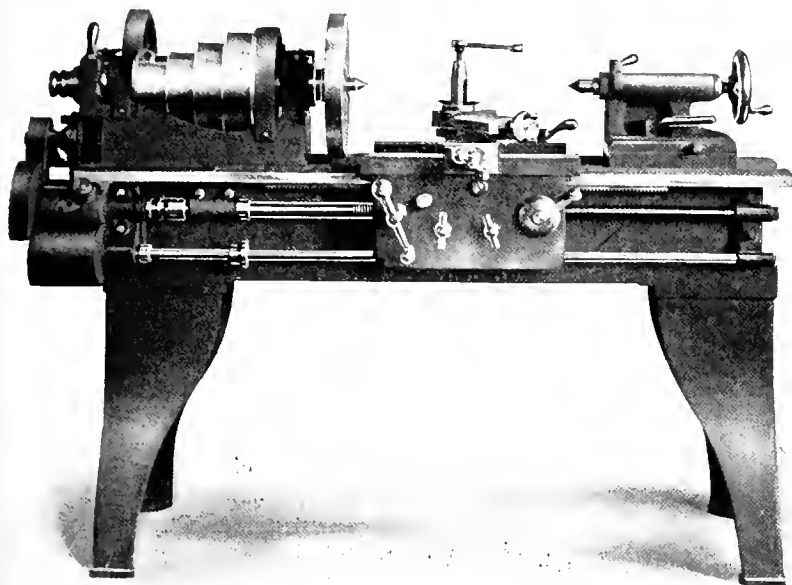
An Engine Lathe of Standard Lines, designed for Rapid Reductions
